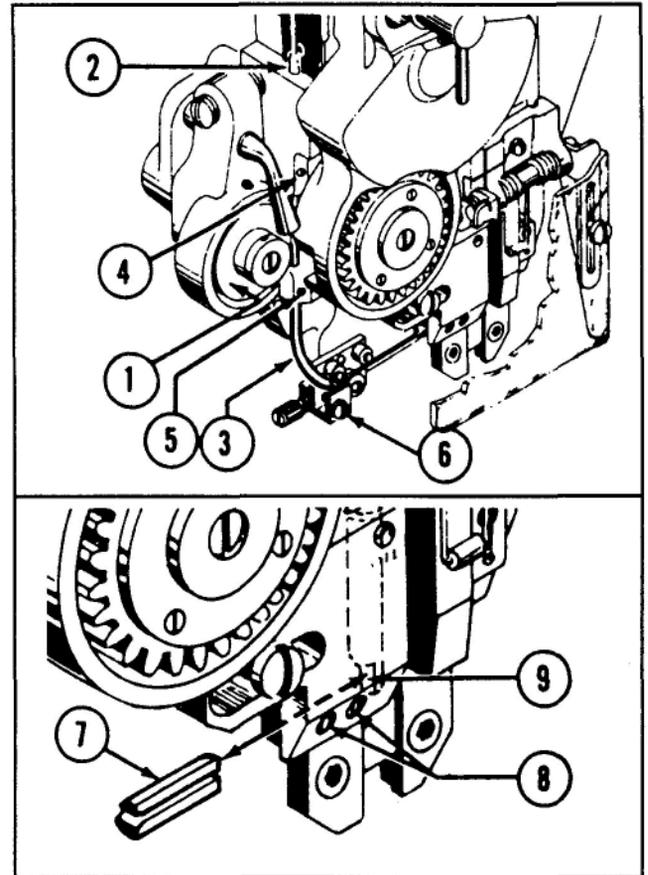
Adjustments for Aligning Gripper Bar and Formers
